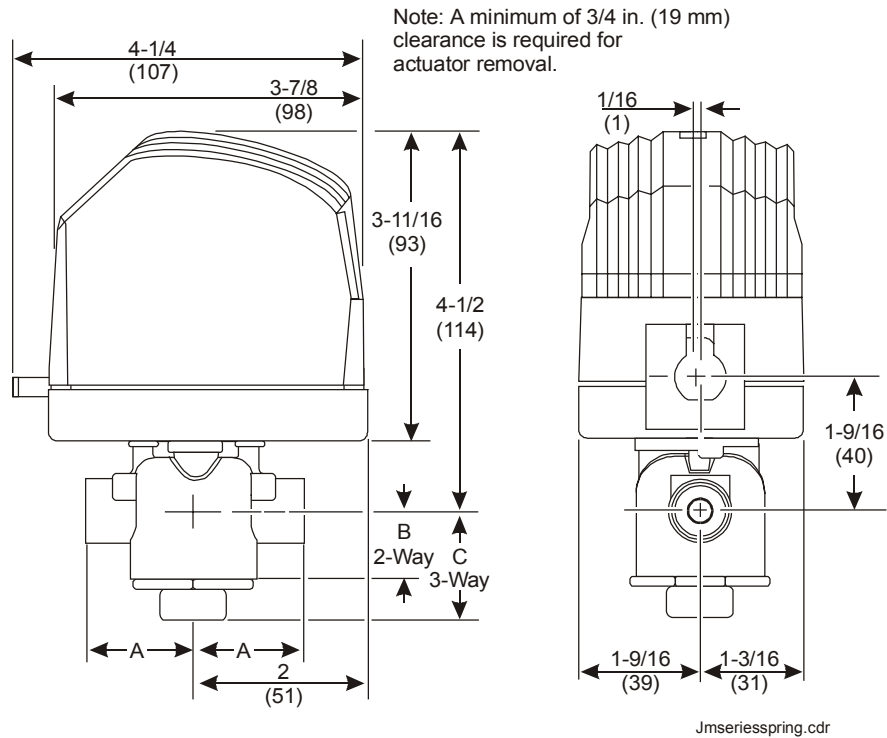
JM Series Spring Return Modulating Electric Zone Valve Dimensions, in. (mm)
